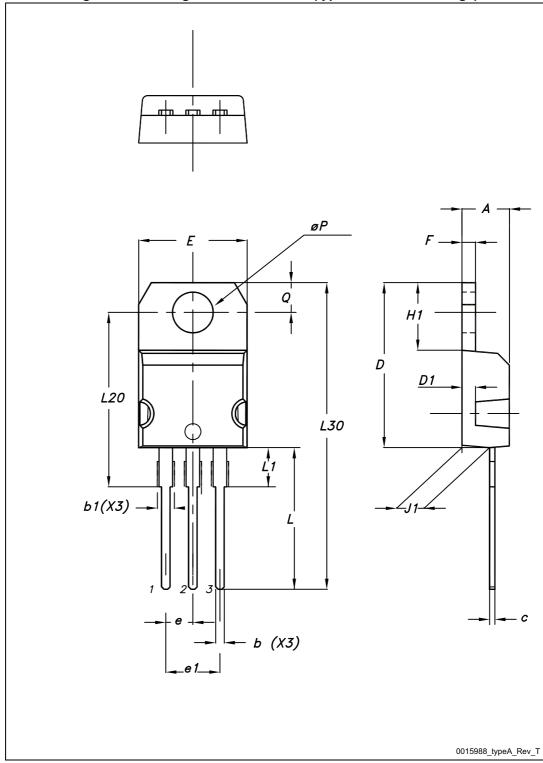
Drawing dimension TO-220 (type STD-ST Dual Gauge)
